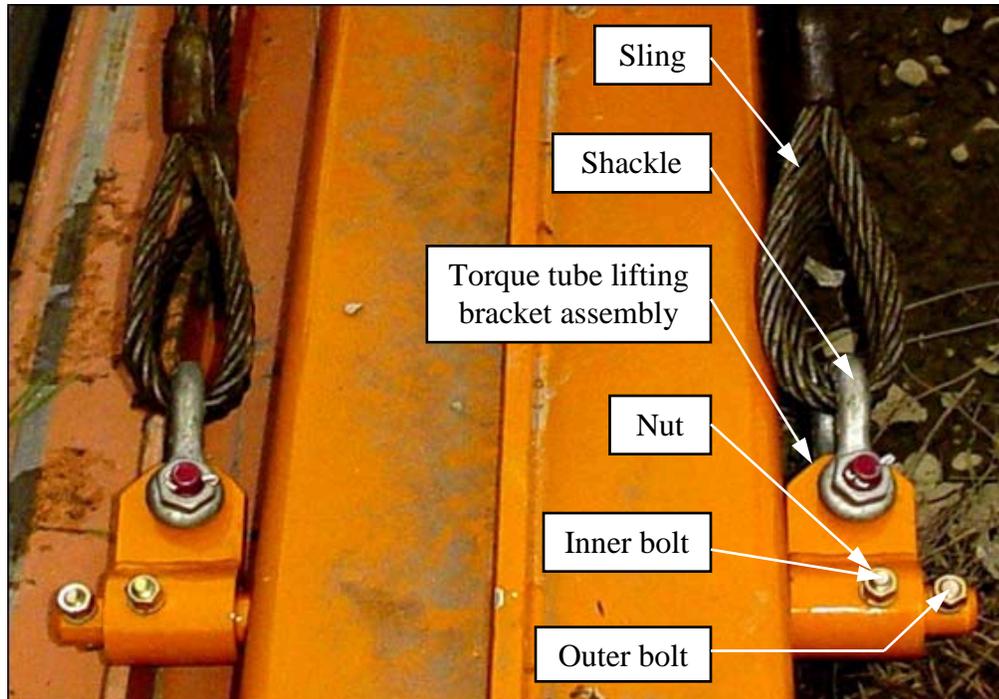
Typical arrangement of torque tube lifting bracket assembly (non-fabricated parts)
